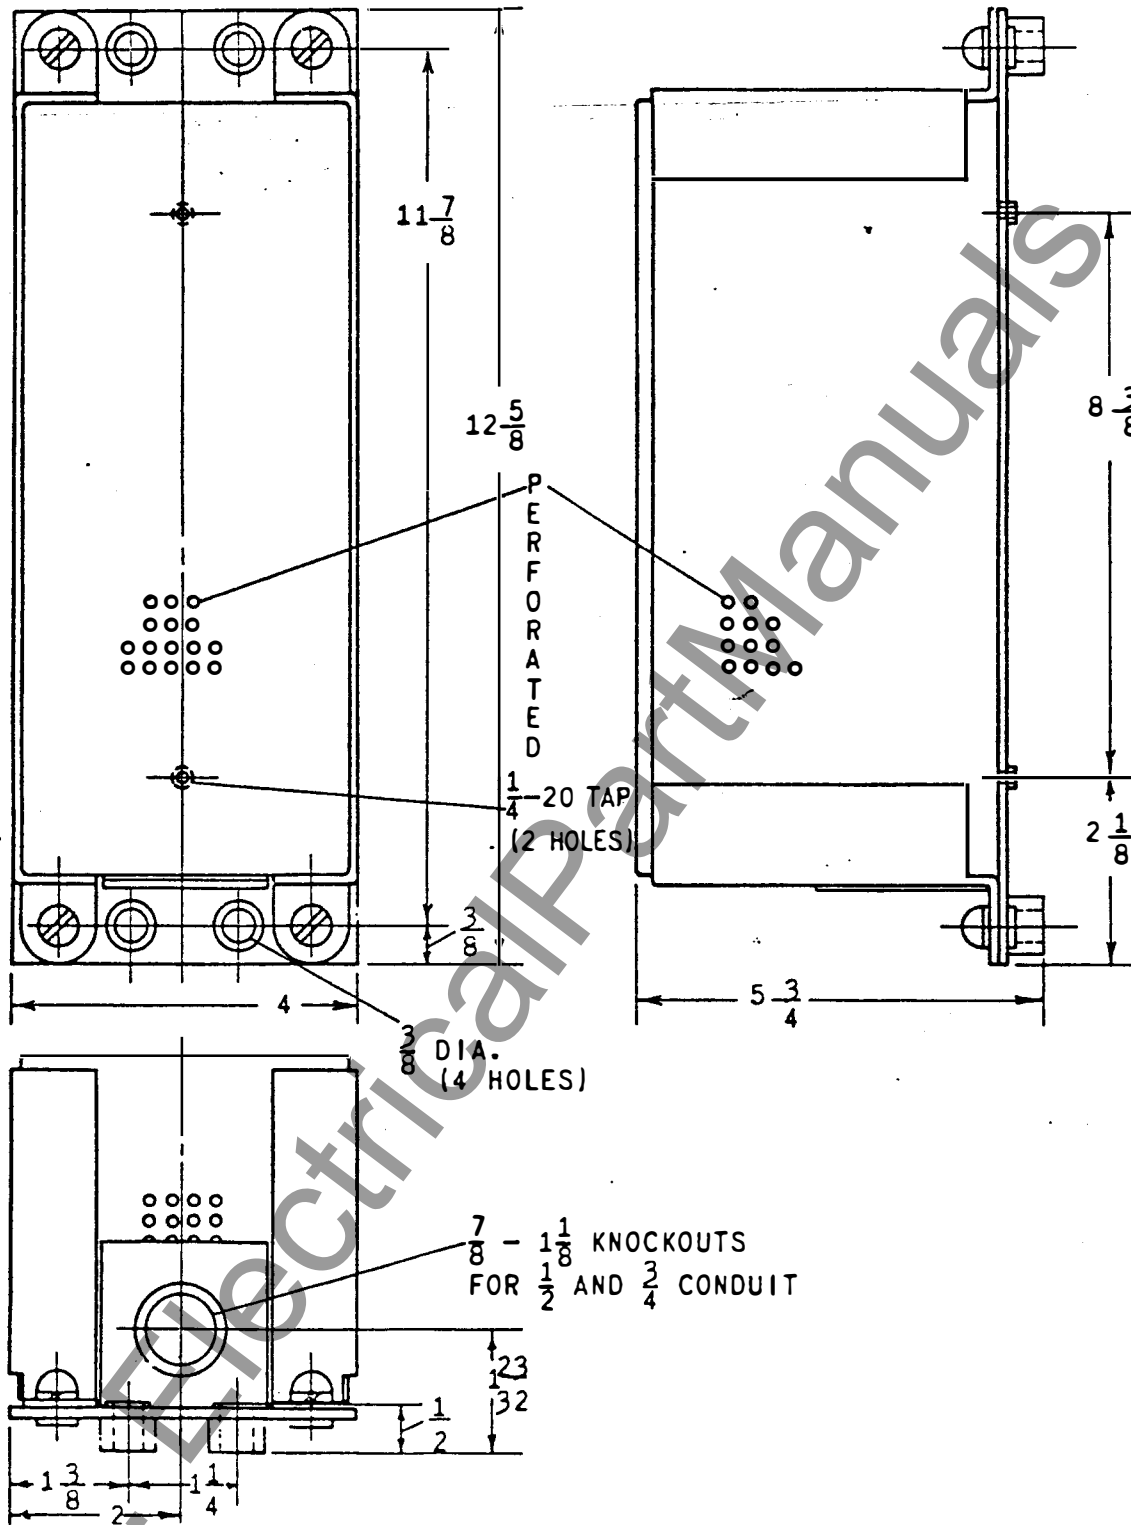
Outline Dimensions for External Resistor used with Type CFT12A Relay
